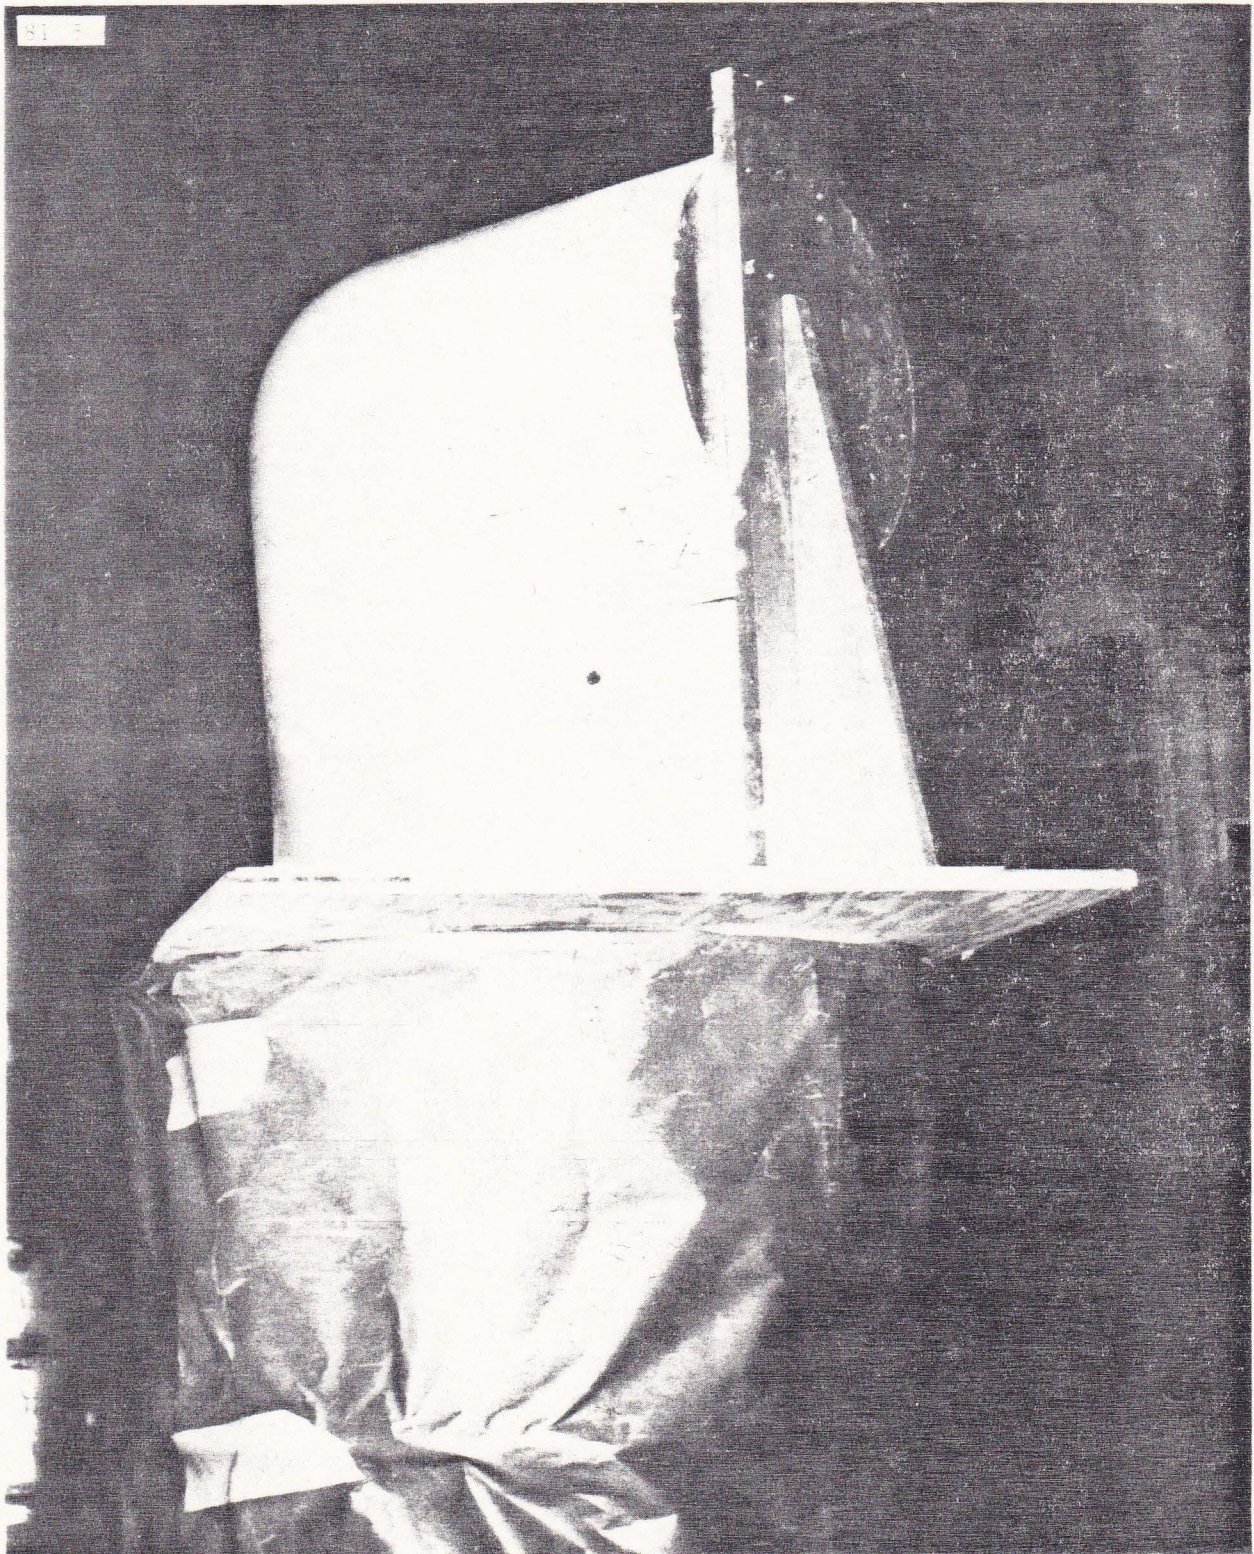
MASTER MODEL FOR ENGINE AIR INTAKE DUCTS
